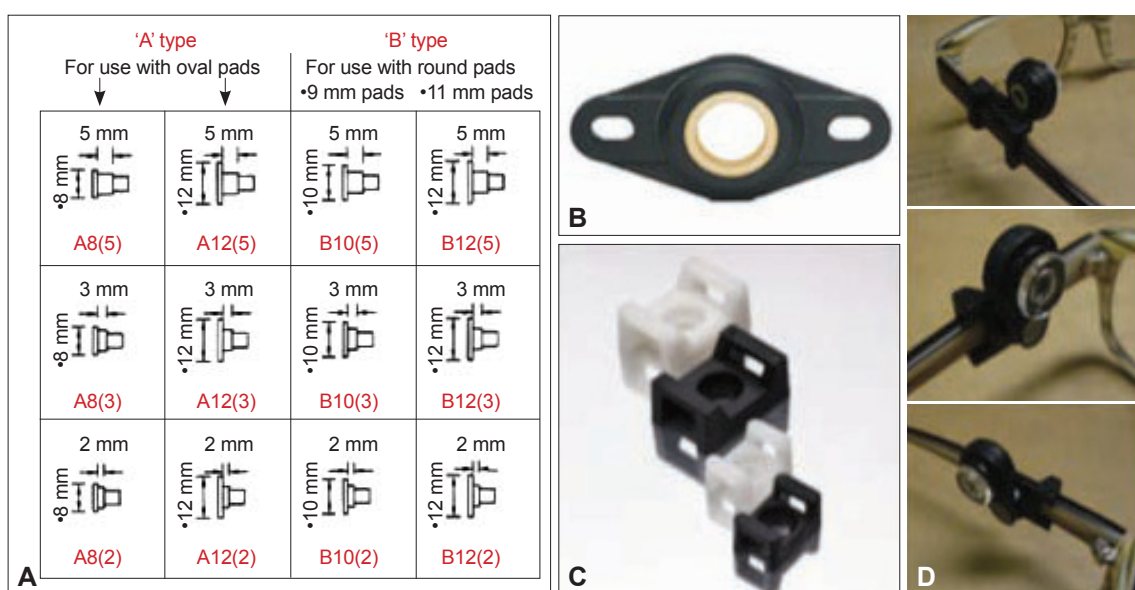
A: Silicone pressure pad mounts for STF and components and the details of the spectacle pressure pad parts. B: Igubal flange prematching shape. C: Screw fix cradle. D: STF mounted on spectacle arm. STF: sensory trick frame.
